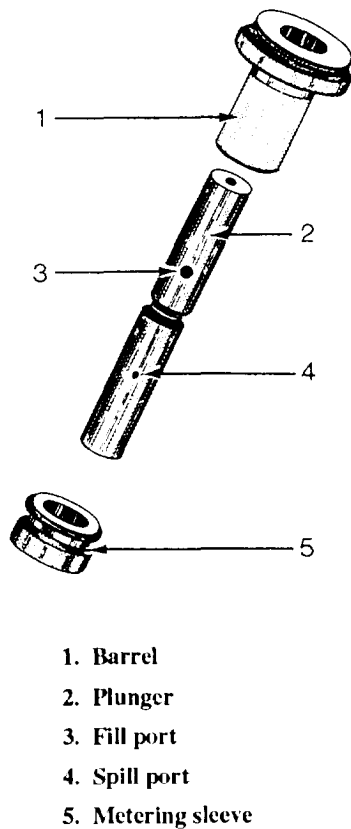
Sleeve metering barrel and plunger assembly.
